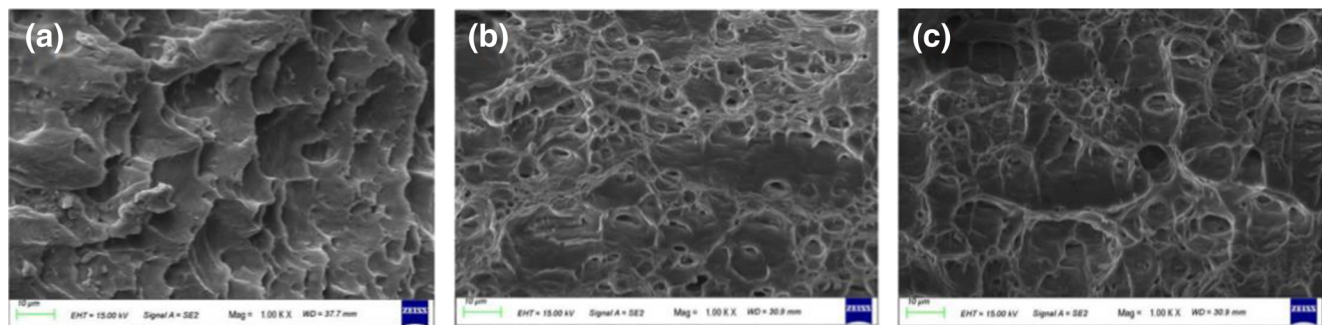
Fracture surfaces of the failed joints: a 0-joint, b 5-joint, and c 10-joint
